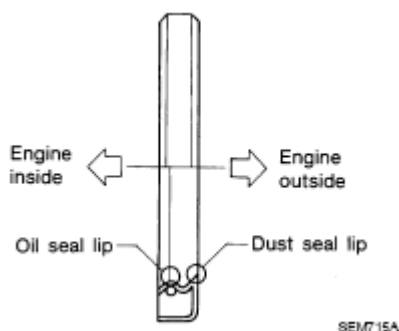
Identifying Oil Seal Lip And Dust Seal Lip
